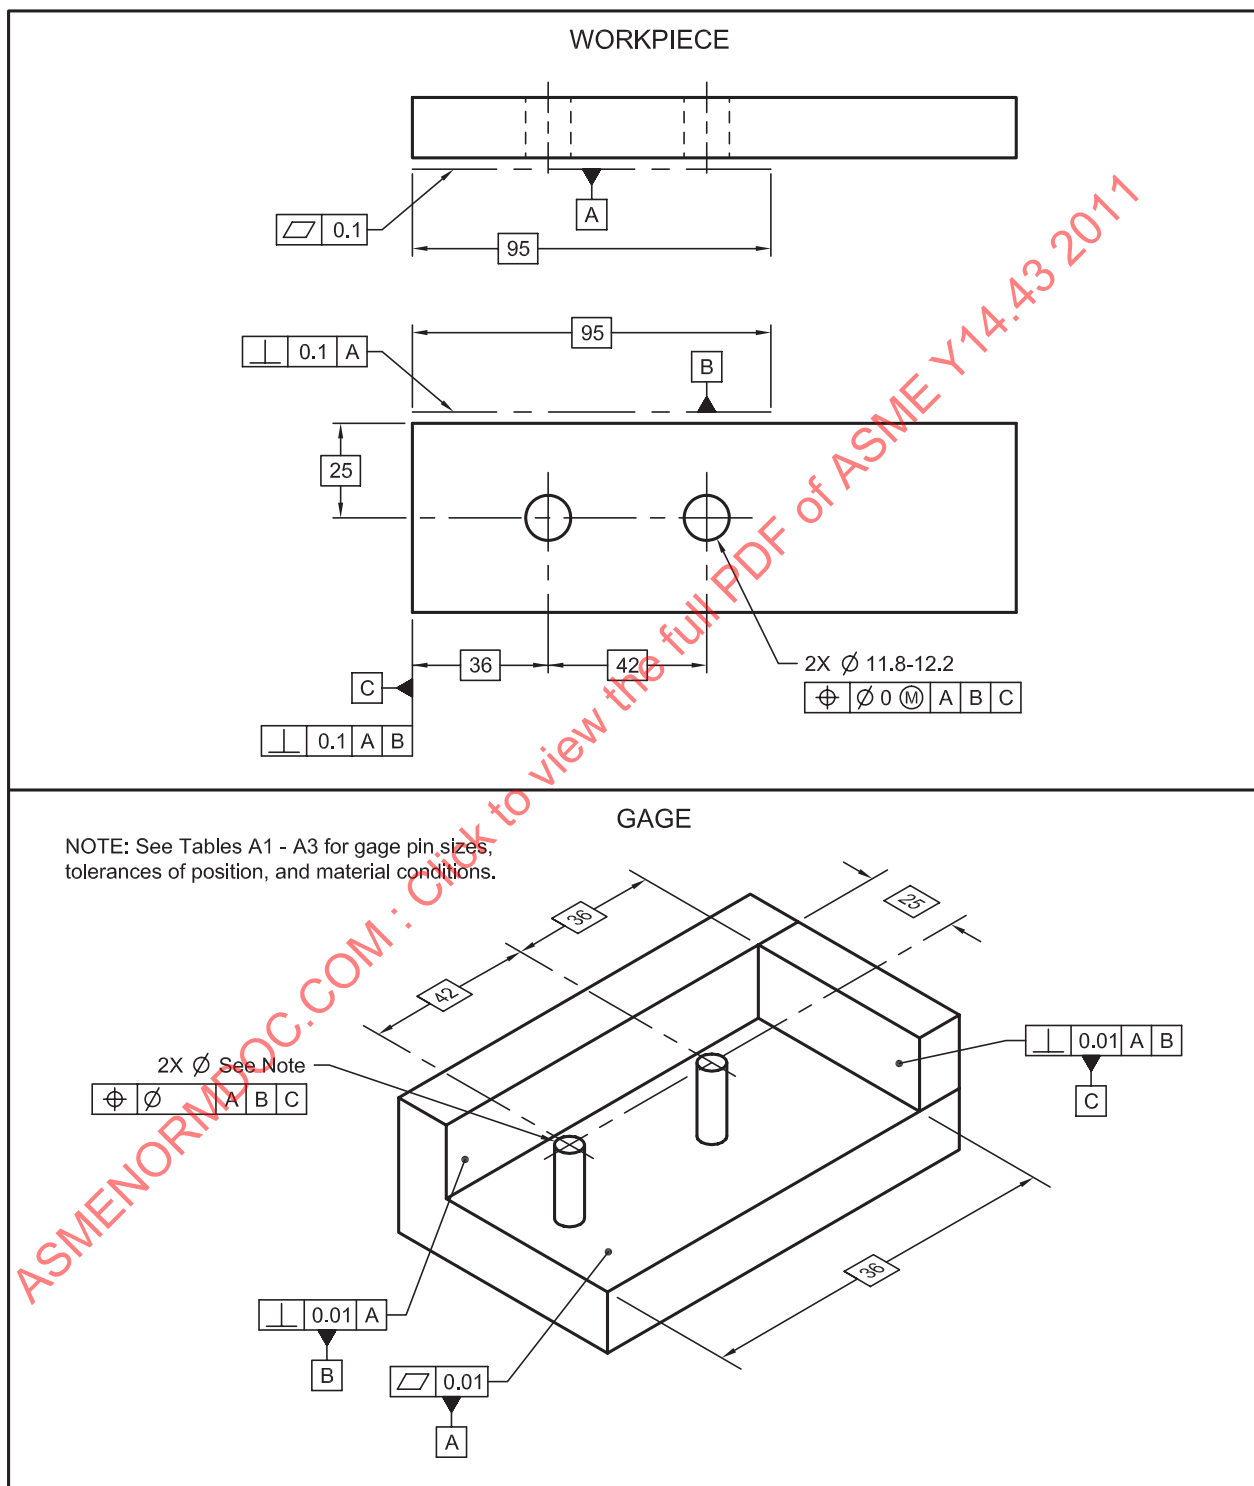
(a) Practical Absolute — Direct Percentage Tolerance Method
